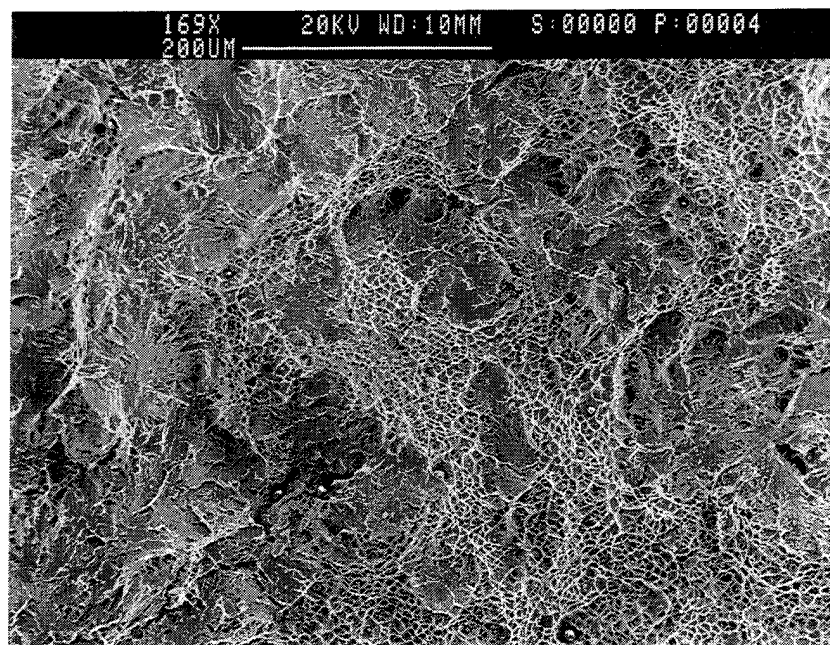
MV20 - GTA Weld Using C5 Cover Gas Showing Extensive Areas of Ductility and Crack Formation by Large Inclusions
